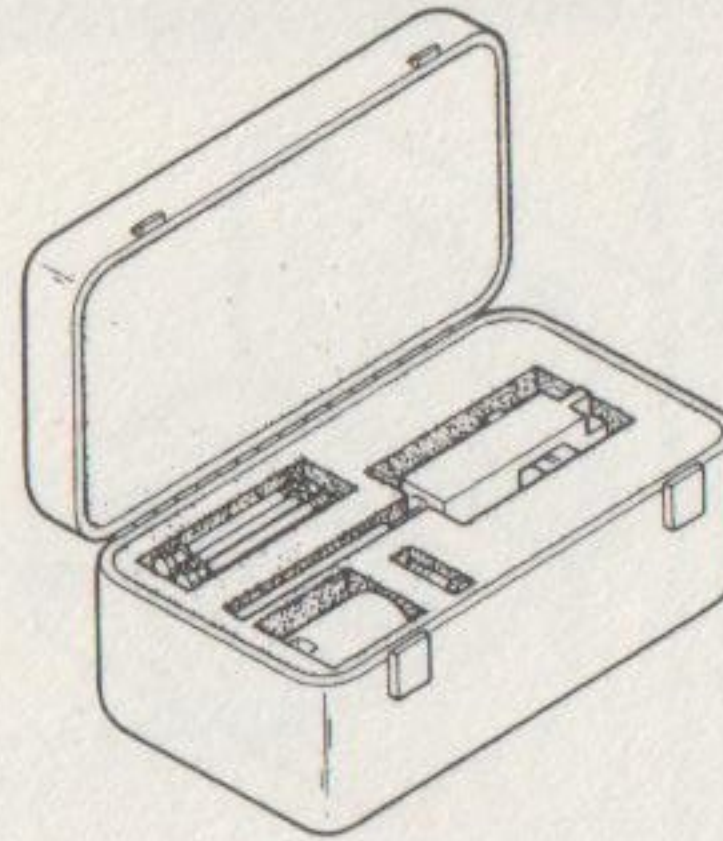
INTERNAL INSPECTION SET (SHEET 1 OF 3)
